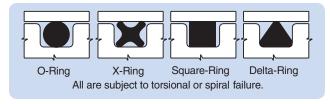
Ring Cross-Sections for Reciprocating Seals
